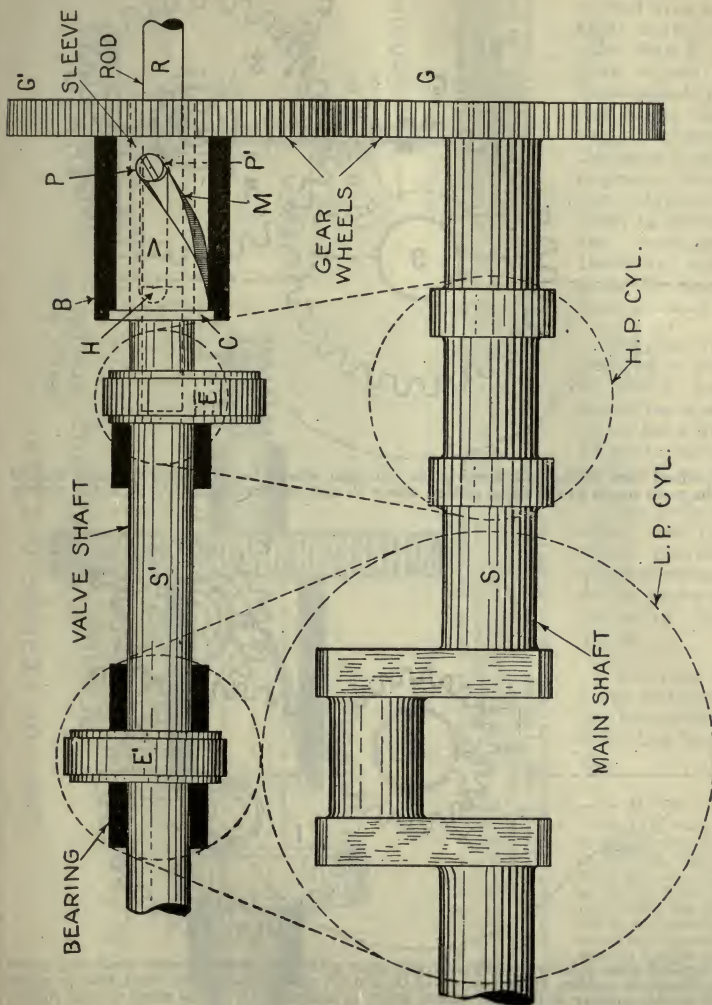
Loose reversing eccentric gear: marine type as applied to multi-cylinder engines with valves on the side. The principle of reversing is the same as in figs. 541 and 542, that is, it is accomplished by the action of the pins P, P', attached to the reverse rod R, in moving the length of the spiral and straight slots.
